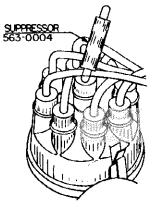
DISTRIBUTOR SUPPRESSOR 563-0004
